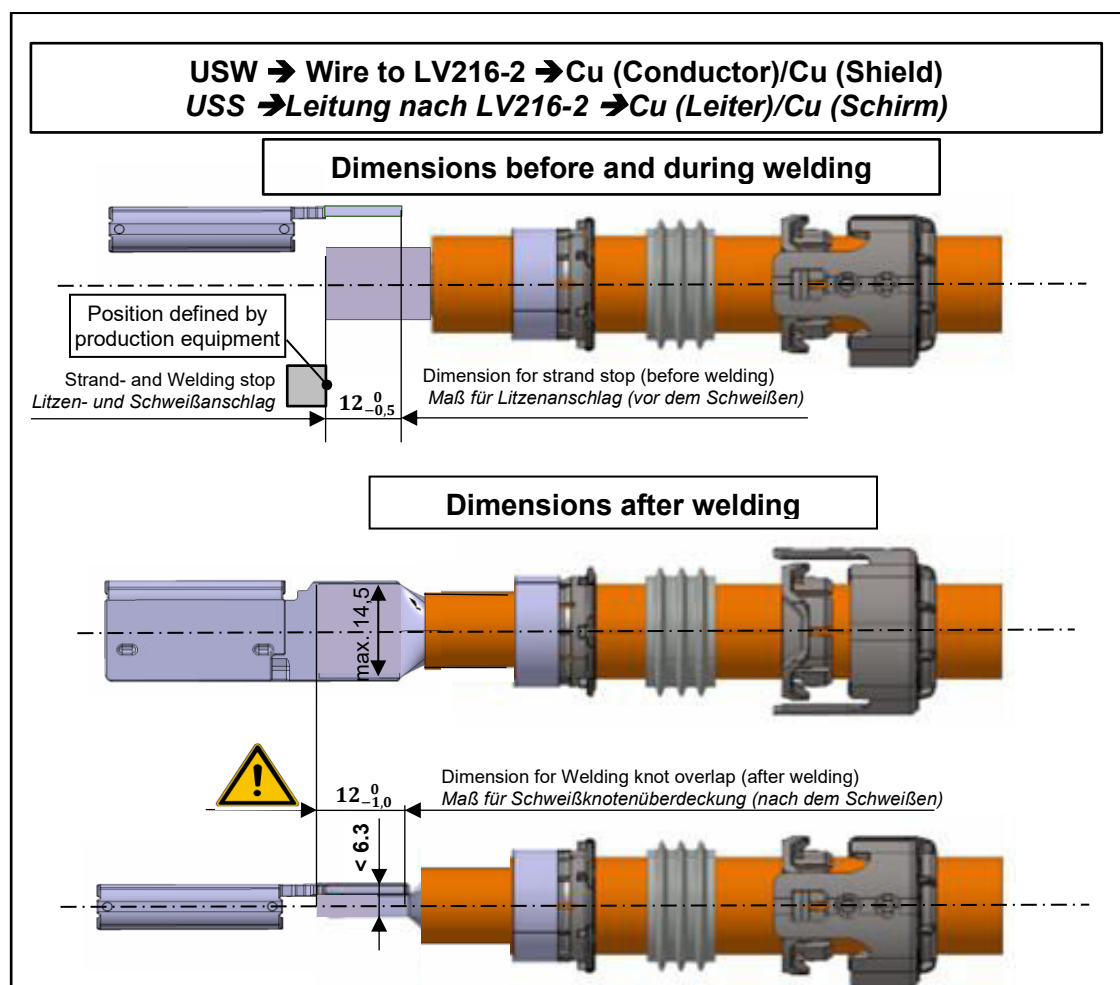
Dimensions to ultrasonic welding; Cu-Conductor(as an example for 50 mm²)
